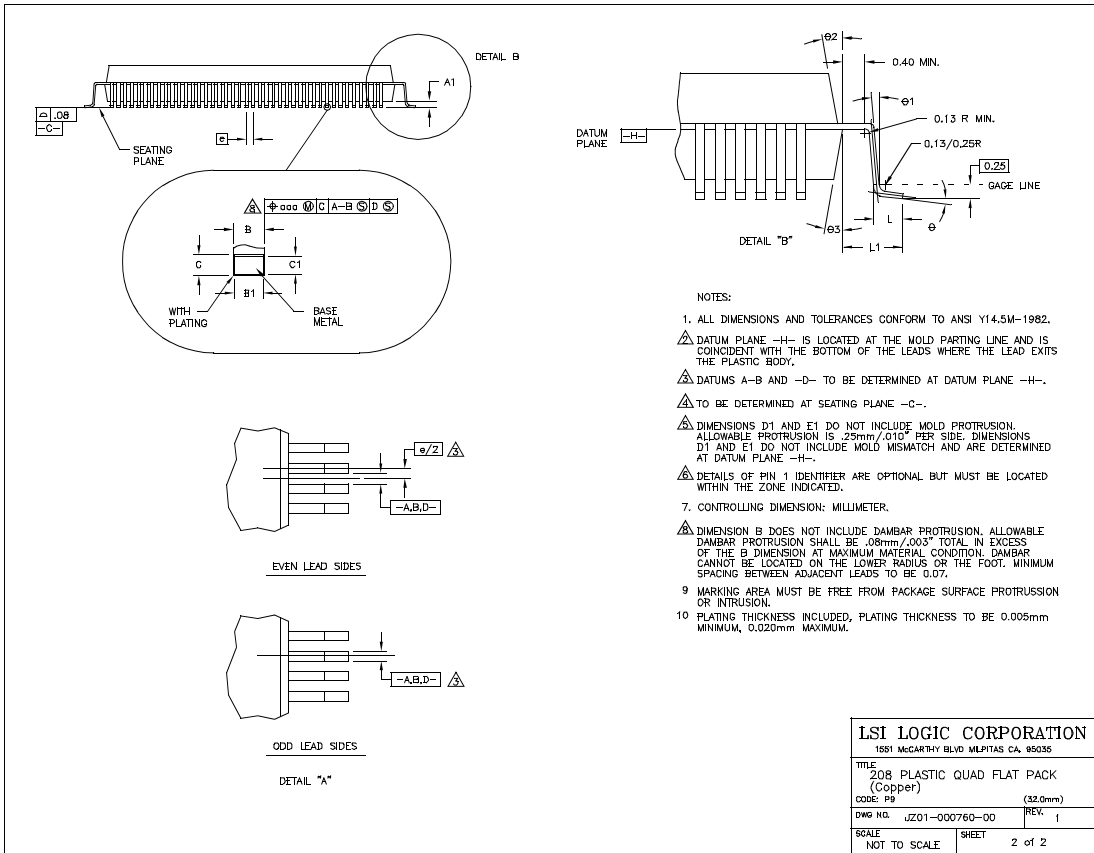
is the mechanical drawing for the 208 PQFP and Figure 6.43 is the mechanical drawing for the 272 PBGA for the LSI53C895A.
